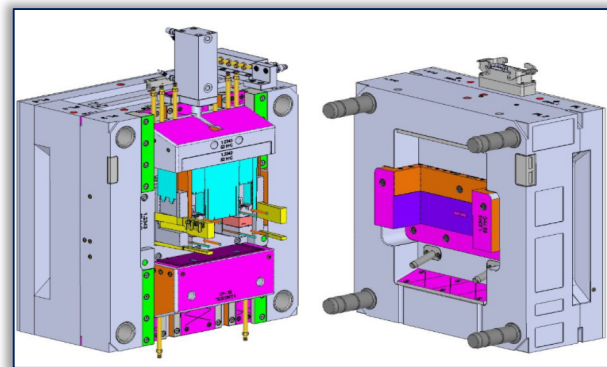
Plastic injection molding tool “DOOR 2x36DIN”
